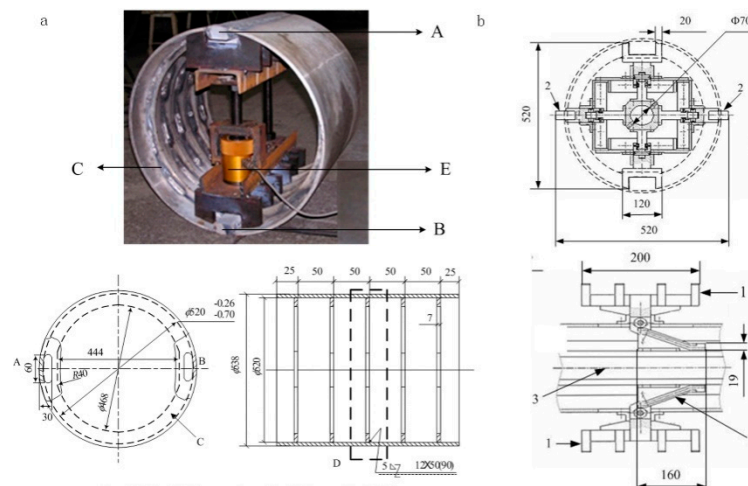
The welding structure and finite element (FE) model. (a) Welding structure: first, the stiffeners (C) were welded onto the cylinder substructures (D) by 24 separate fillet welds; the welding fixtures (E) were installed on the whole structure to make sure it would not collapse; then, parts A and B were removed by machining; finally, the five cylinder substructures were welded together by four butt welds. (b) Welding fixture, 1-Vertical supporting claws; 2-Horizontal supporting claws; 3-Central spindle; 4-Linkage and rolling wheel.
